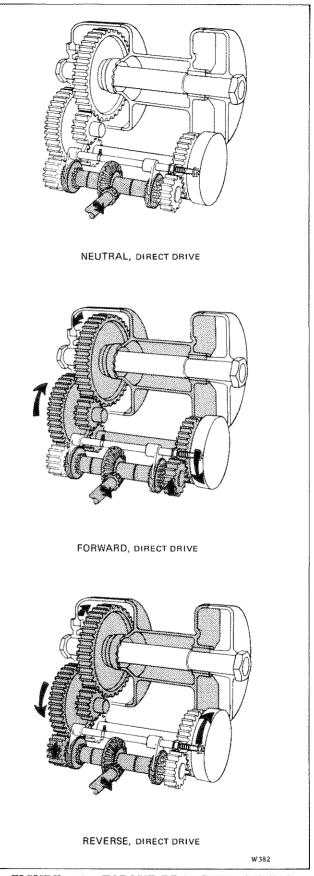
TORQUE TRANSFER, DIRECT DRIVE WINCH
